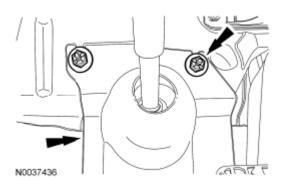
Locating Steering Joint Cover And Nuts Courtesy of FORD MOTOR CO.
